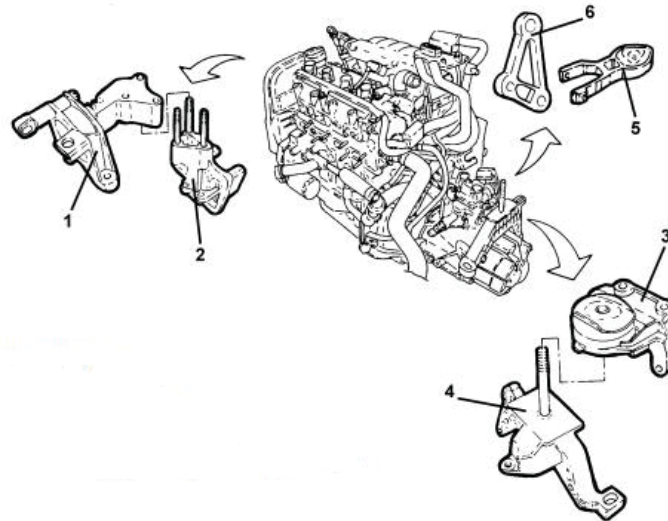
Elements for mounting investigated object (1 - flexible connector on timing gear side, 2 - rigid support on timing gear side, 3 - flexible connector on gearbox side, 4 - rigid support on gearbox side, 5 - reaction rod on differential gear side, 6 - rod fixing support on differential mechanism side) [5]
